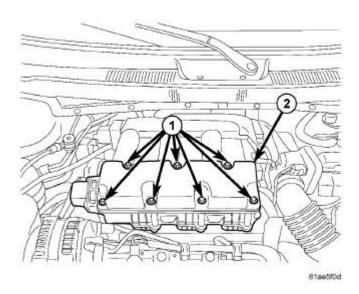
INTAKE RETAINER VIEW Courtesy of CHRYSLER LLC
